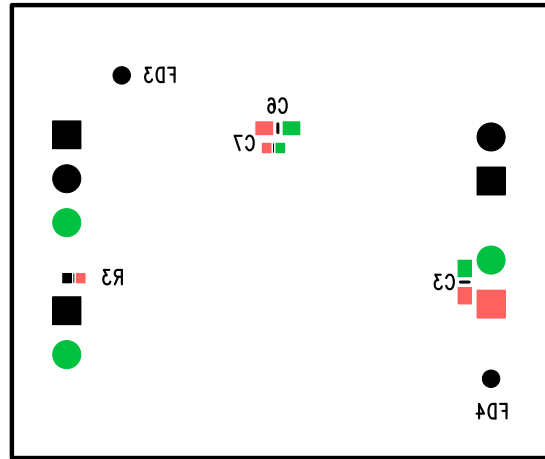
CRD35L01-FSD Bottom Side Component Placement
